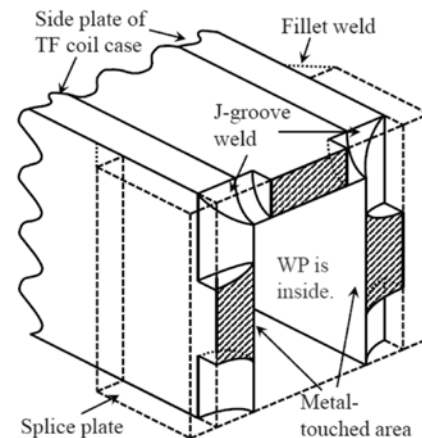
Proposal of weld groove for the top joint of TF coil case.
